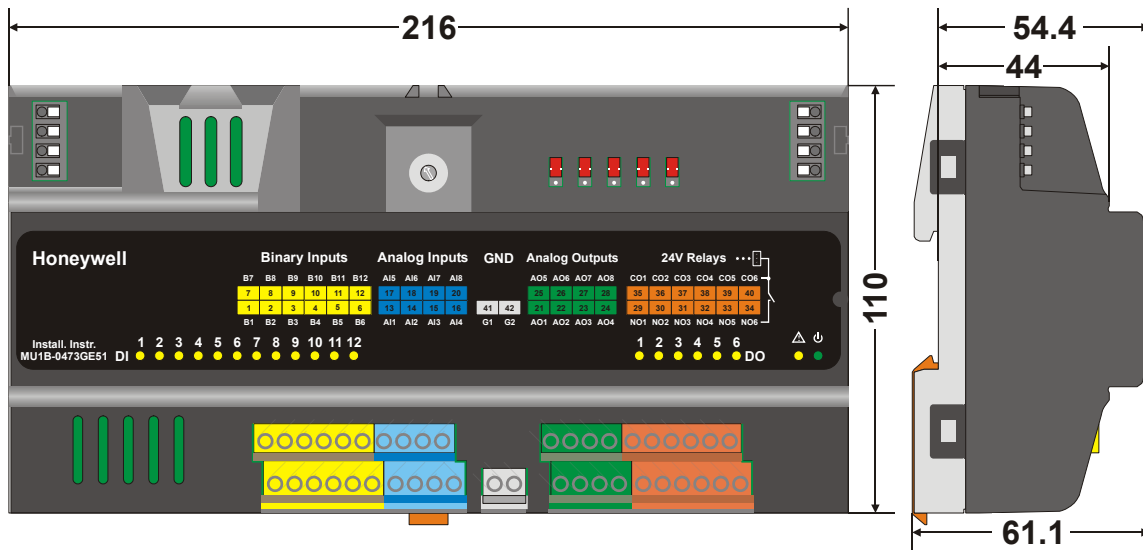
Mixed Panel Bus I/O Module MVC-IO830A, dimensions (in mm)
